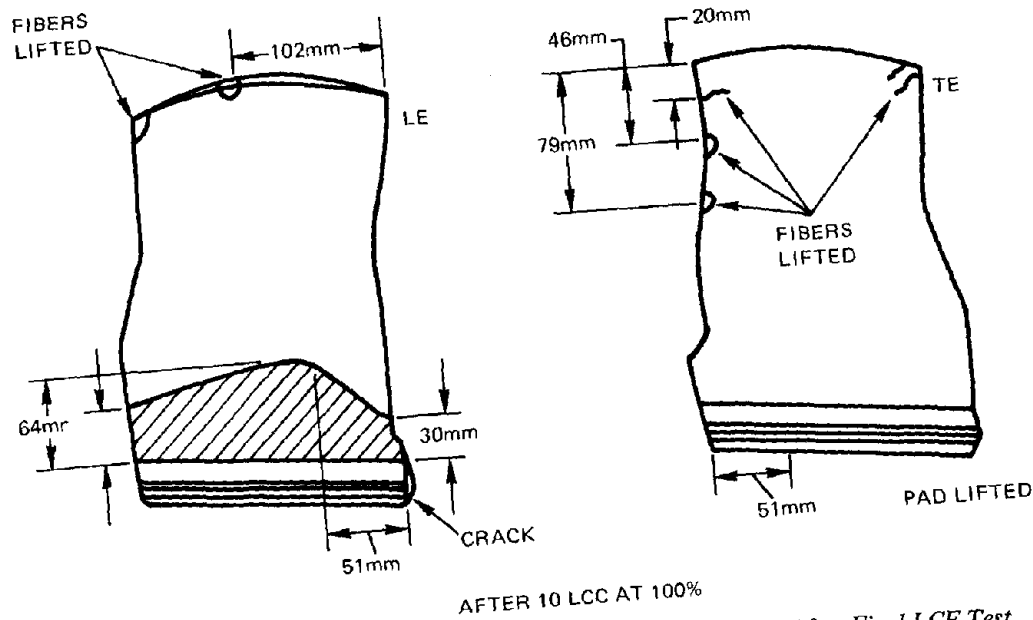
Blade Inspection Results; Blade Serial No. T-10, After Final LCF Test.
